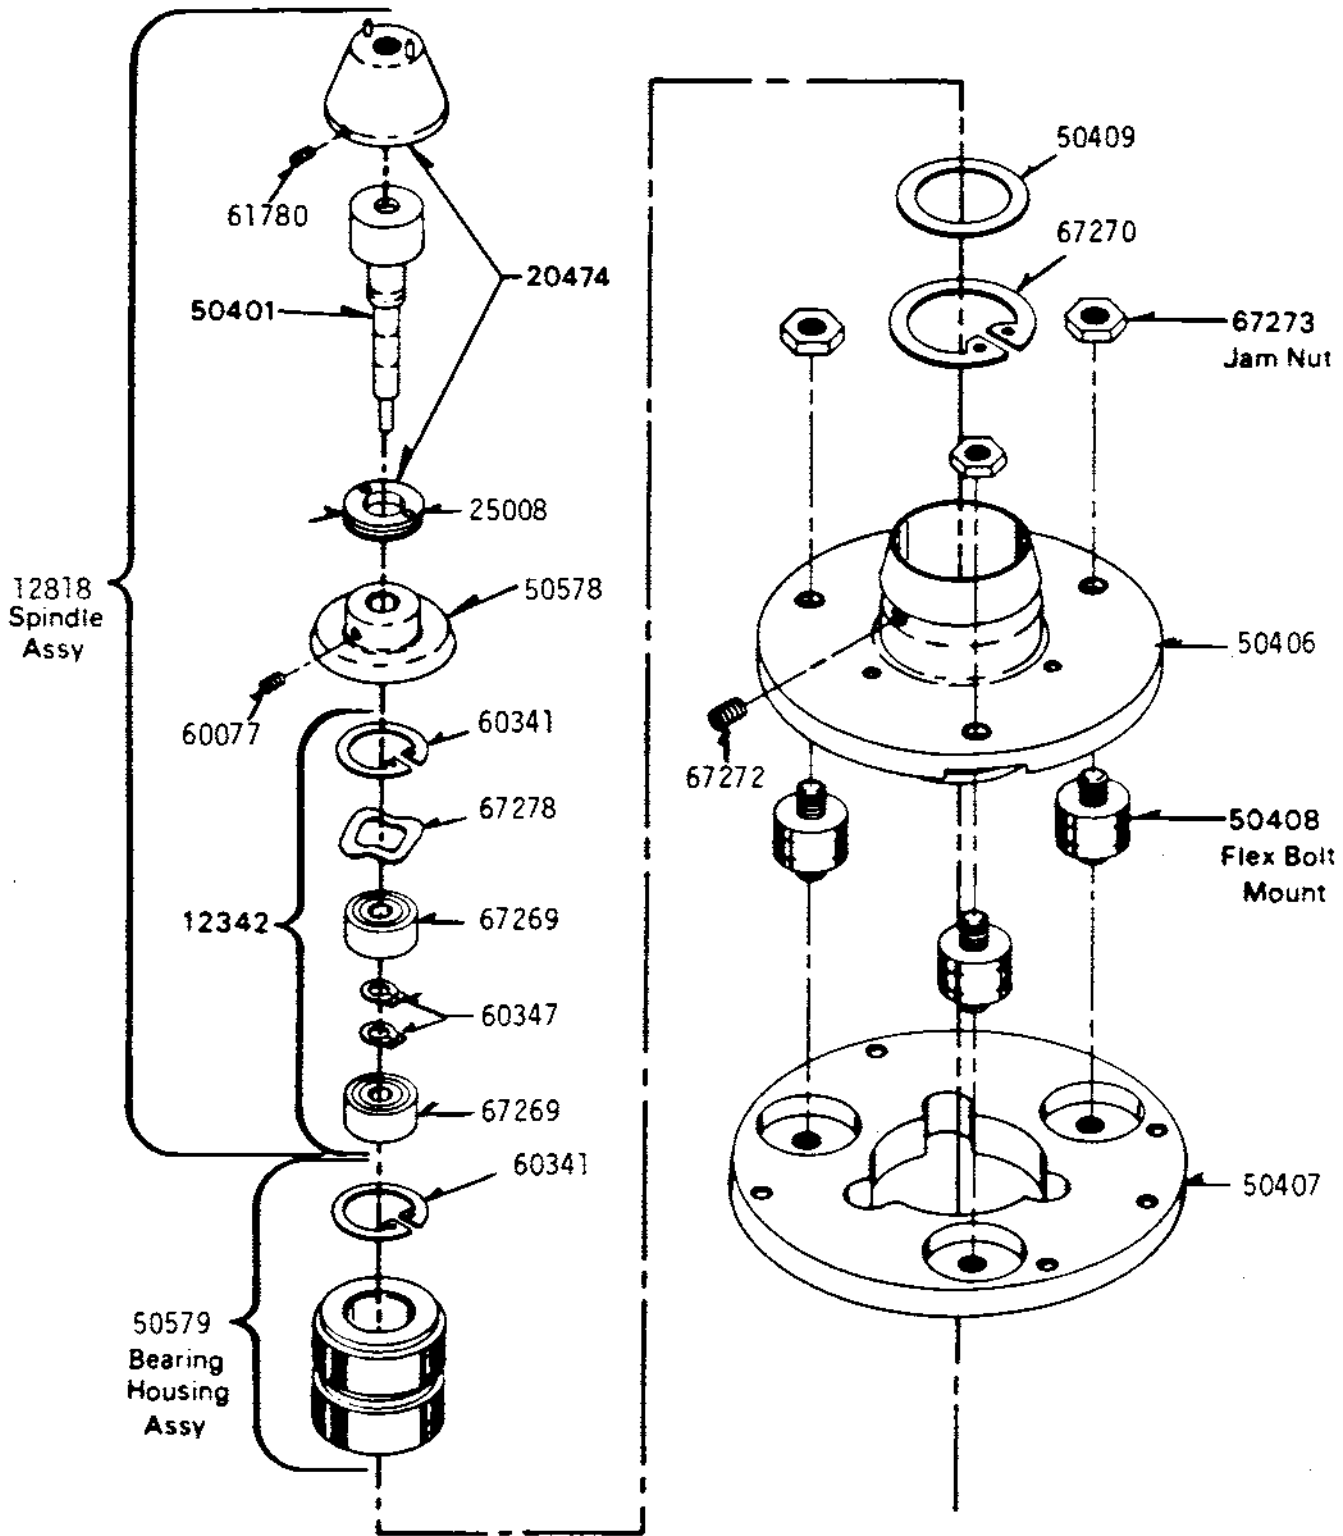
Parts Location: Gyro Action Drive Assembly, PN 12817 (Sn 8004600 and Higher)
